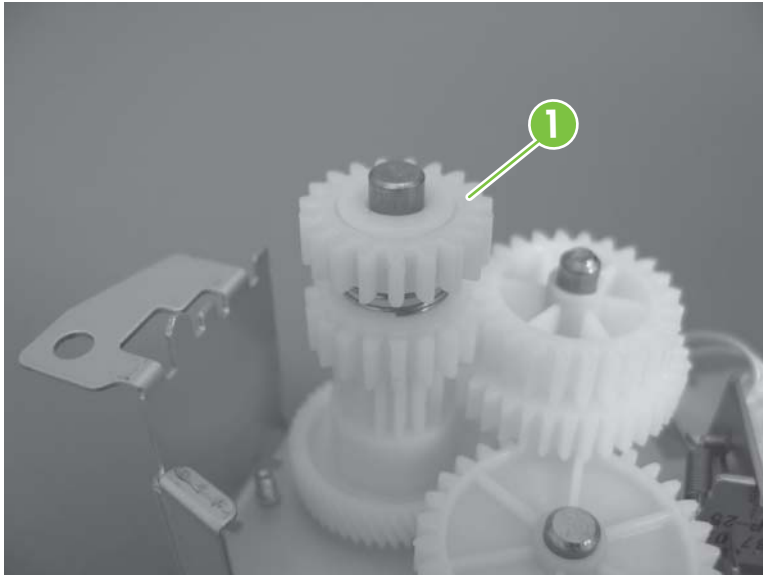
Remove the cassette-pickup drive assembly (10 of 10)
